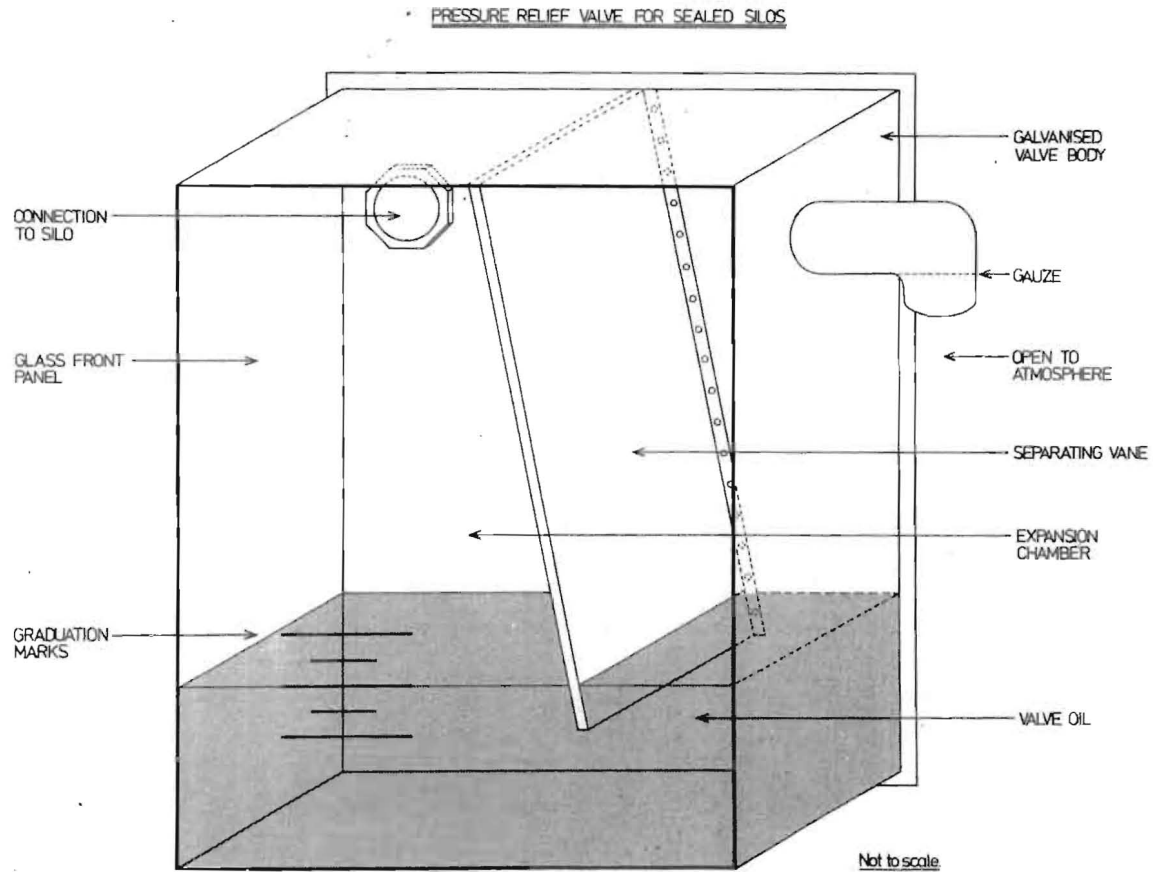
Design of an oil-filled pressure relief valve for a farm bin.
